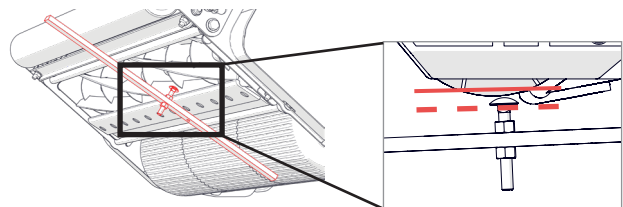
D - Position the setting bar and observe distance between the top of the shear blade and bottom on the bolt head. In this example, the bolt head is below the shear blade, indicating the machine cut height is currently too high and therefore needs lowering.
